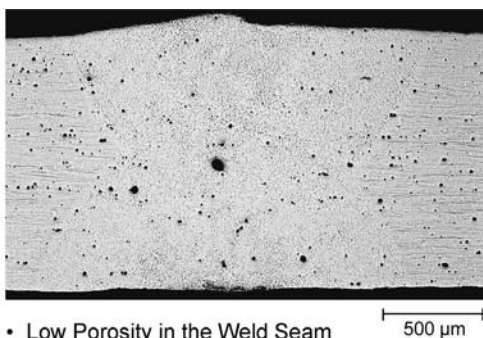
Laser welding at the lap joint sheet metal alloy AZ31
